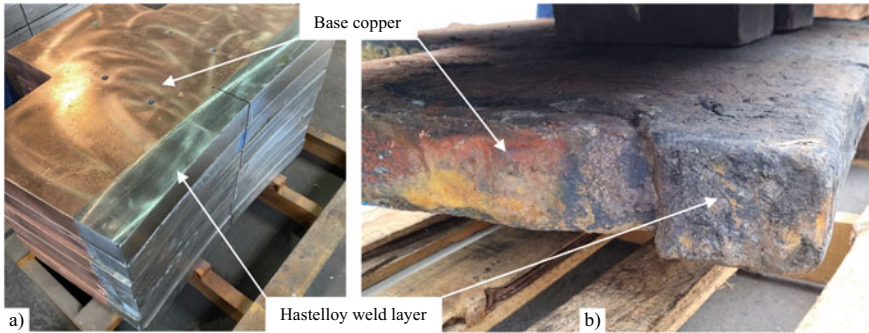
a Machined Hastelloy weld layer on new copper plate coolers; b Used plate cooler showing corroded base copper behind Hastelloy weld layer
